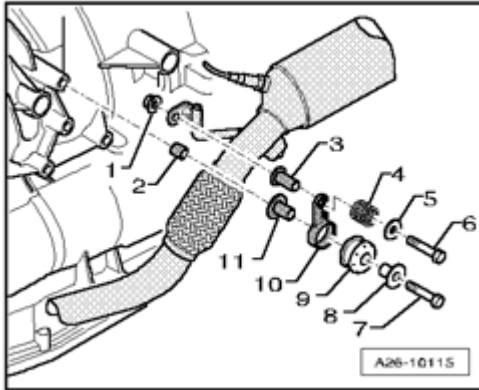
Removing Bolt At Right Bracket For Front Exhaust Pipe
